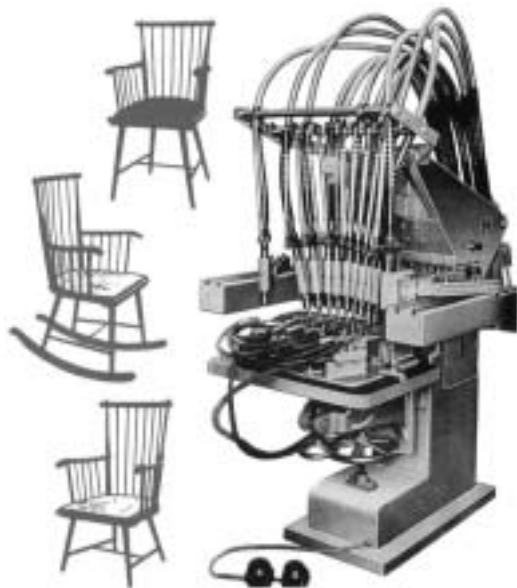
Specialised cyclic multiple-spindle machine (Knoevenagel - Germany)
